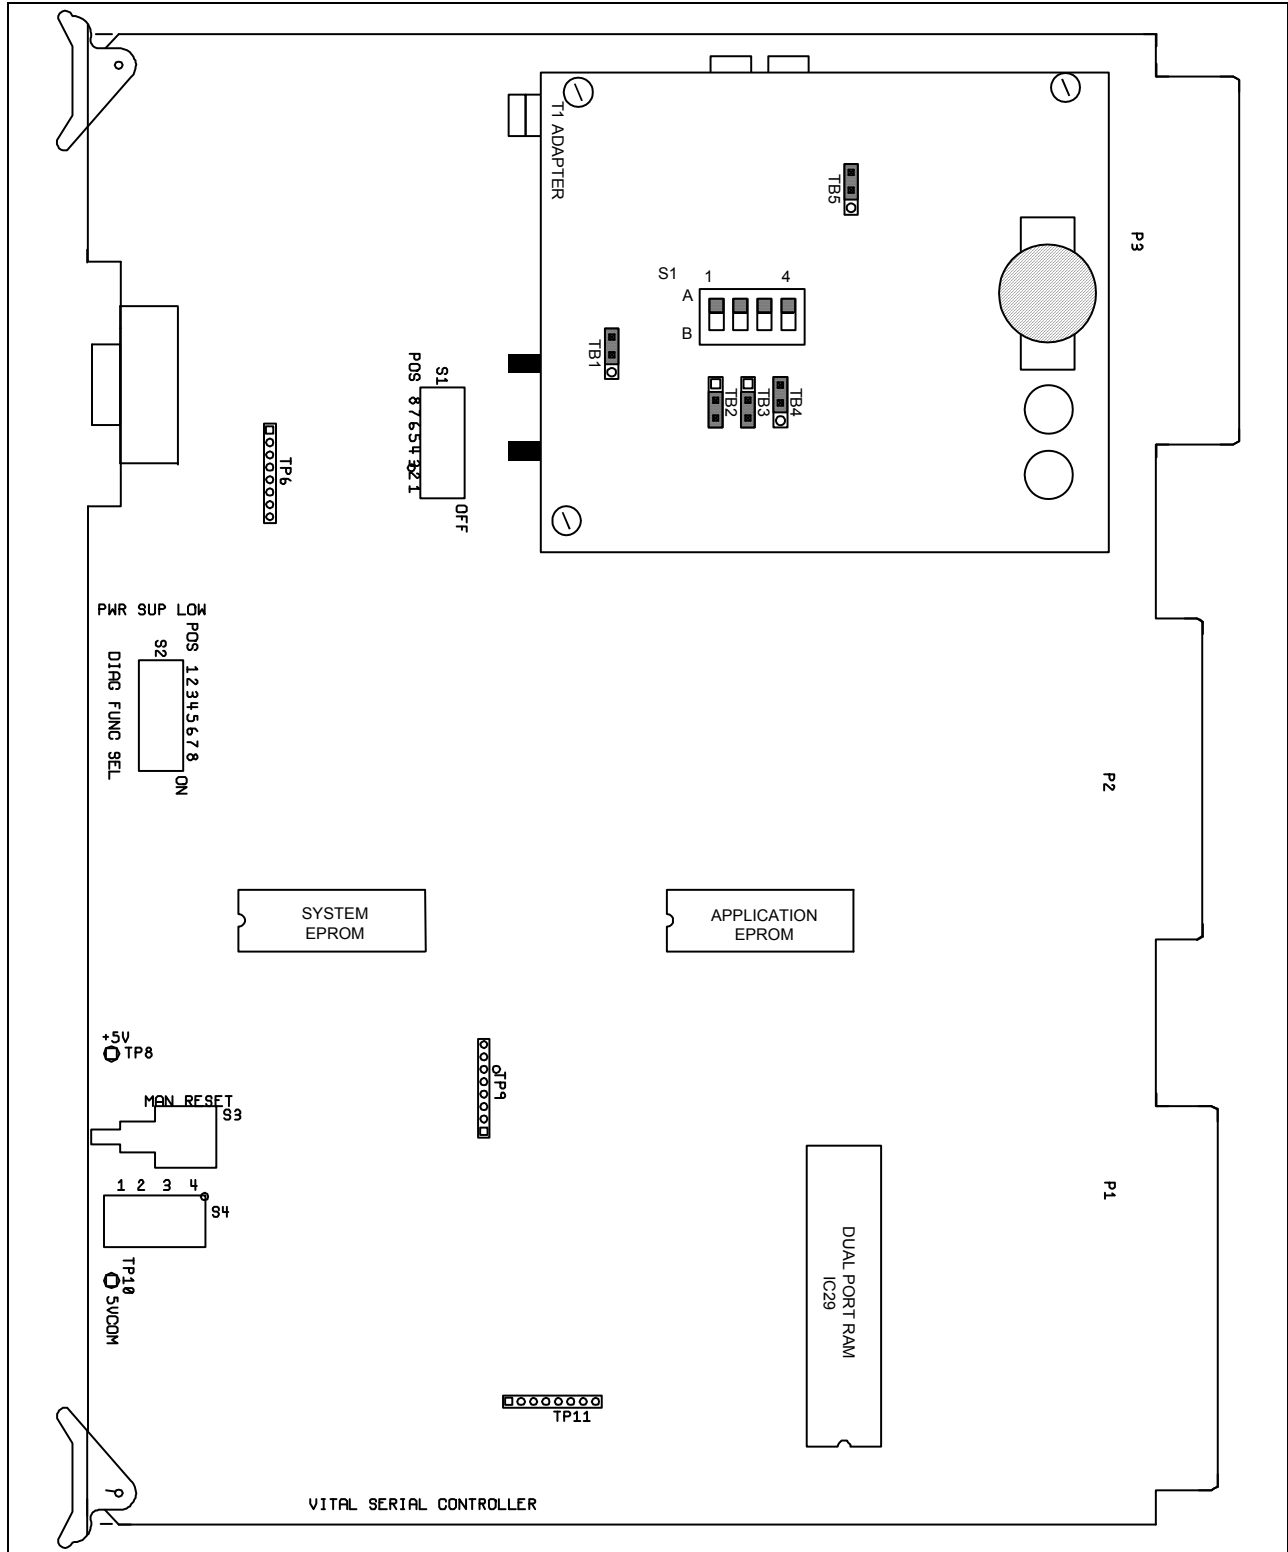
VSC Board with T1 Adapter Board Test Point, Switch, and EPROM Locations
